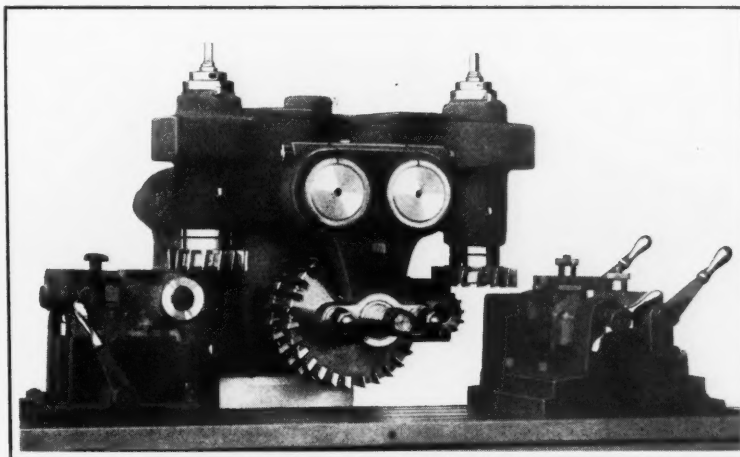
An Example of Reciprocating Milling on a Multiple-spindle Machine
